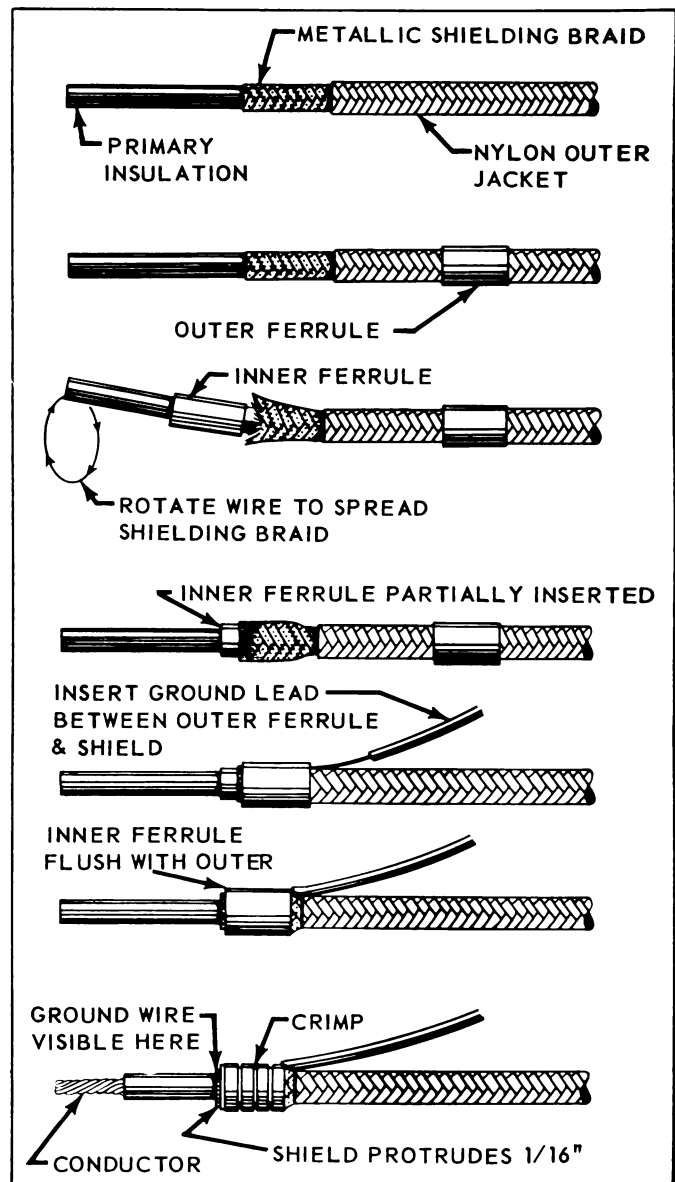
Grounding Sheath Connection for Terminating Shielded Wire
